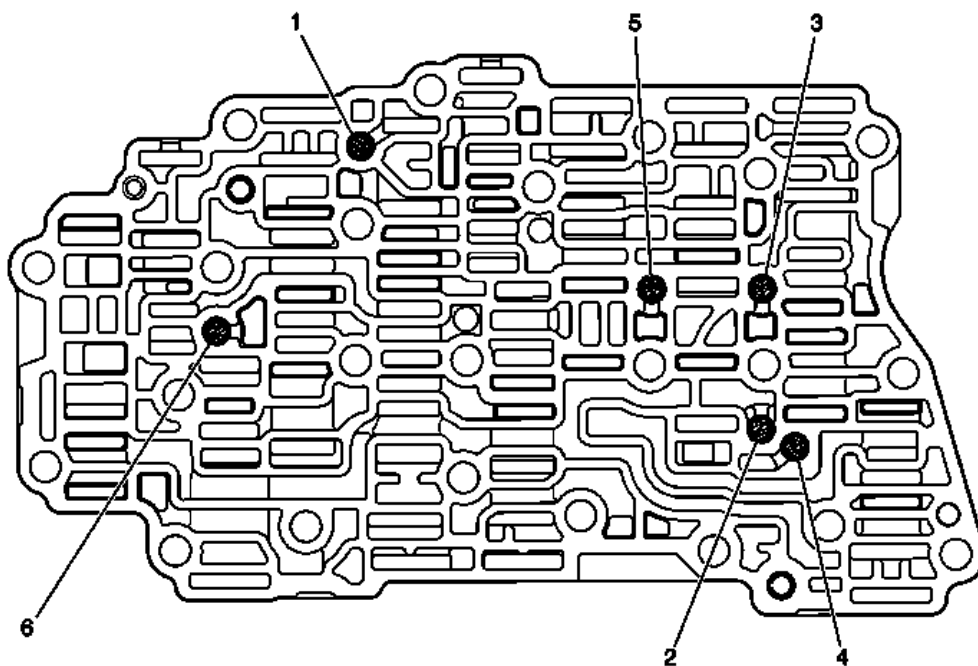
Ball Check Valve Locations (Gen 2/Hybrid)
